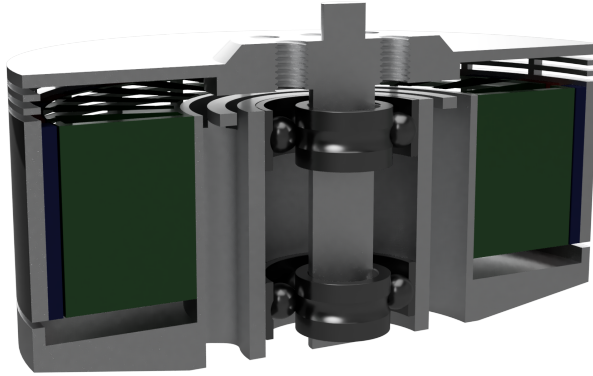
Cross-sectional view of the bearing extraction with Allen keys to visualize the extraction process. As the Allen keys are pulled up to extract the bearing.
